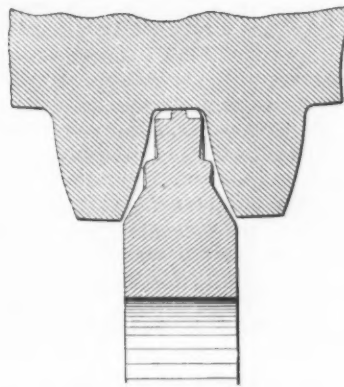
Detail Illustrating the Action of the New Gould & Eberhardt Stocking Cutter.
